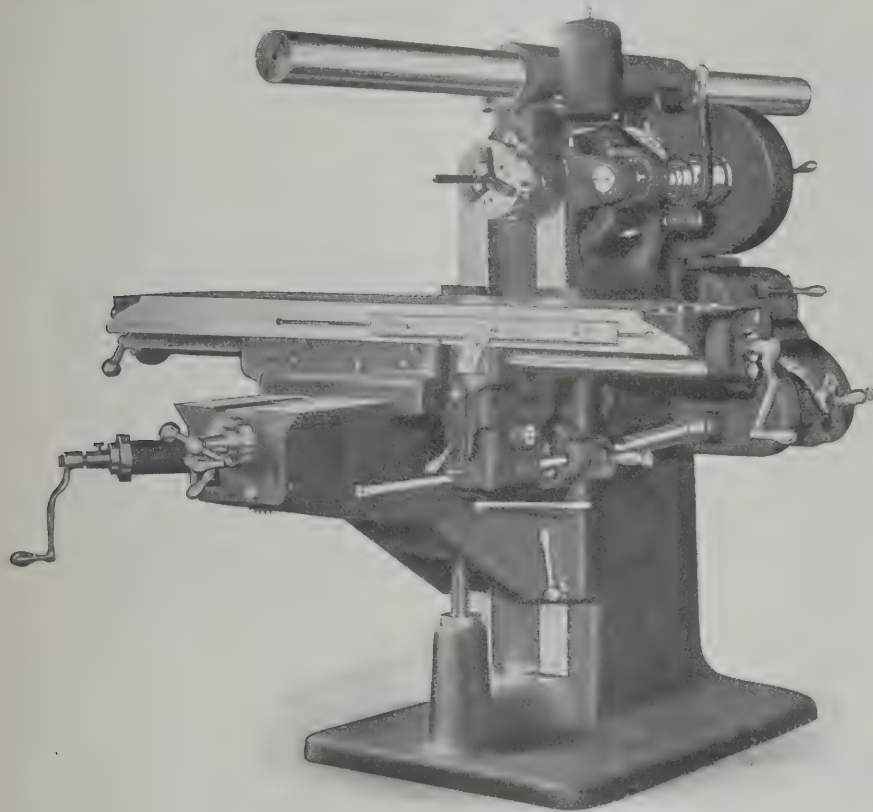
Miller provided with Vernier Gages and other Conveniences for Jig Boring
